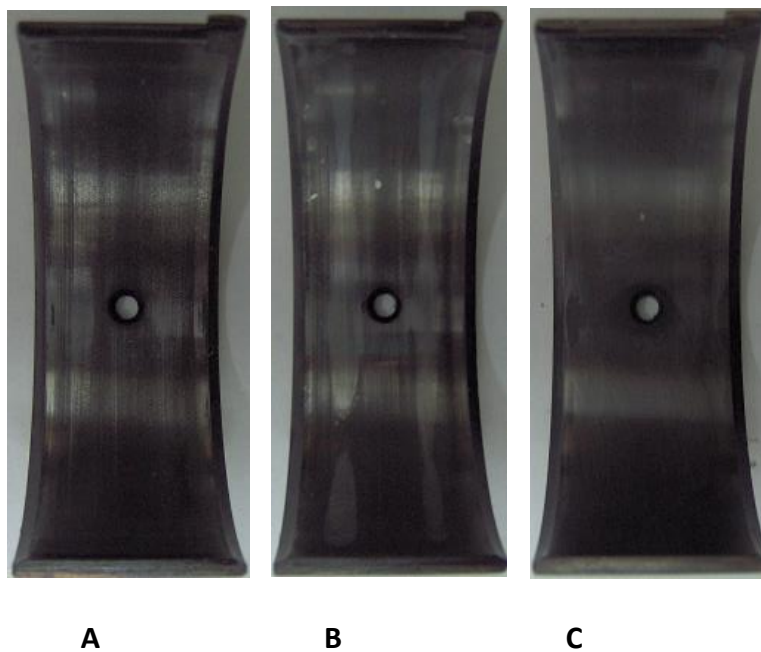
High performance bearings C 697 after King rig test (9500 psi, 4,300,000 cycles)
